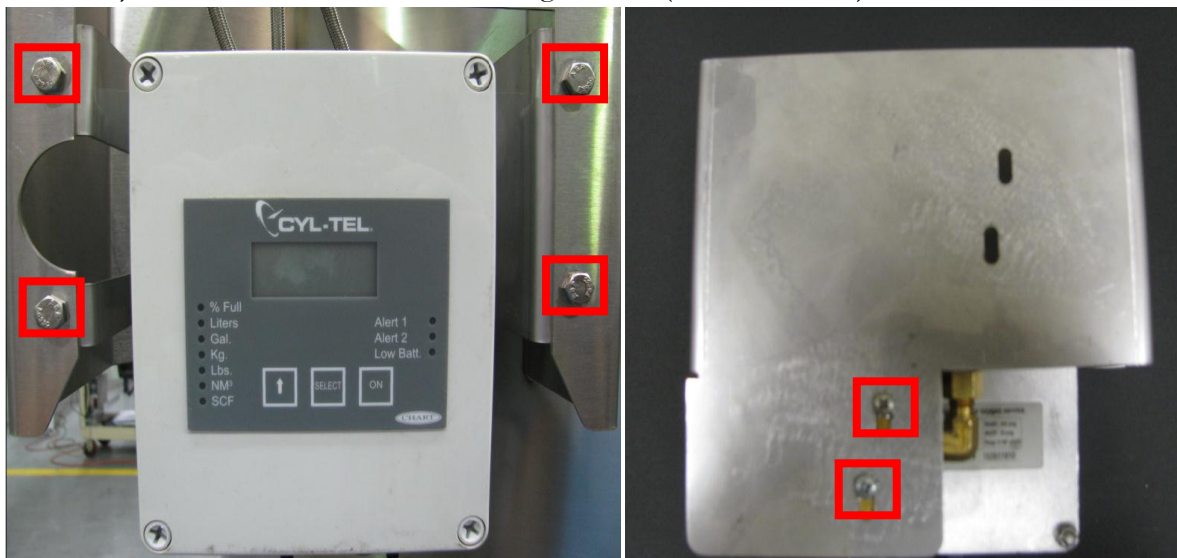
A) Red boxes indicate the 4 bolts that need to be removed. B) Black boxes indicate the 2 screws that secure the mounting bracket to the CYL-TEL.
